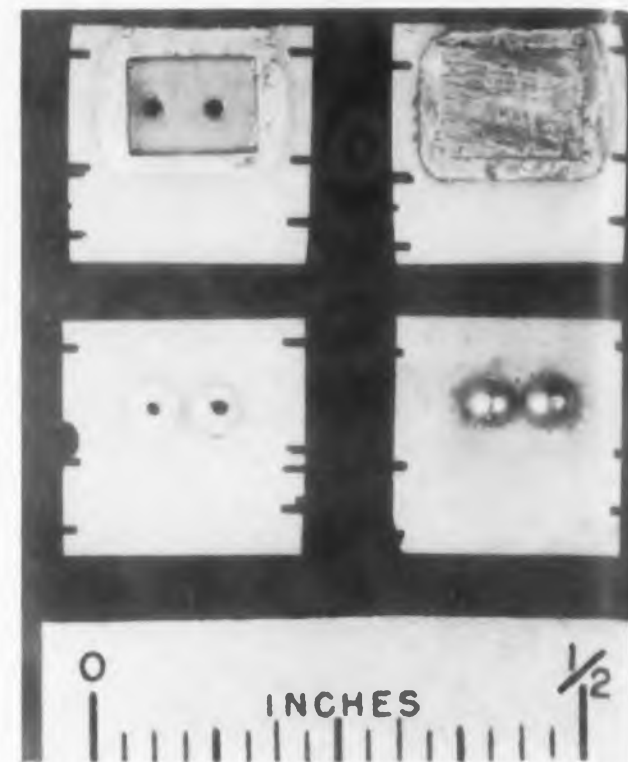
Top and bottom view of ceramic before installation of transistor (left) and finished and sealed assembly (right).
